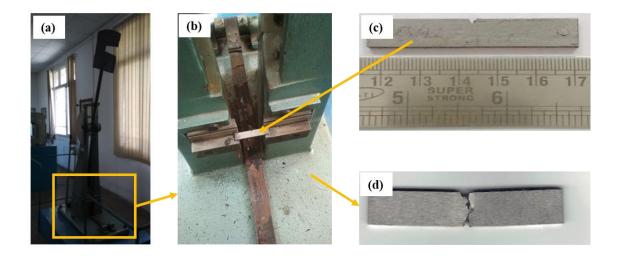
Charpy impact testing process: (a) testing machine, (b) magnified view of the sample holding location, (c) testing sample and (d) fractured sample after performing testing.
